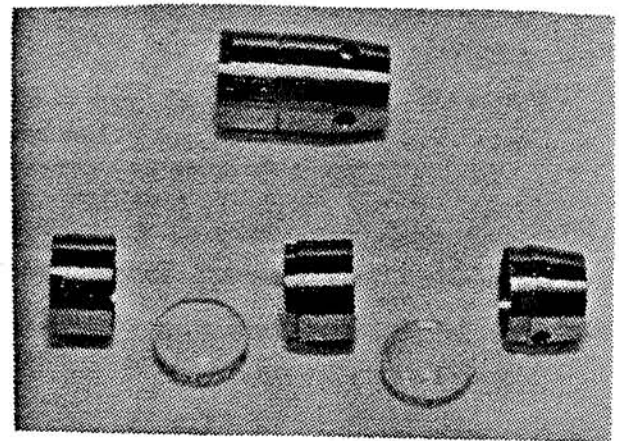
Lens assembly for Siemens laser welding system.
